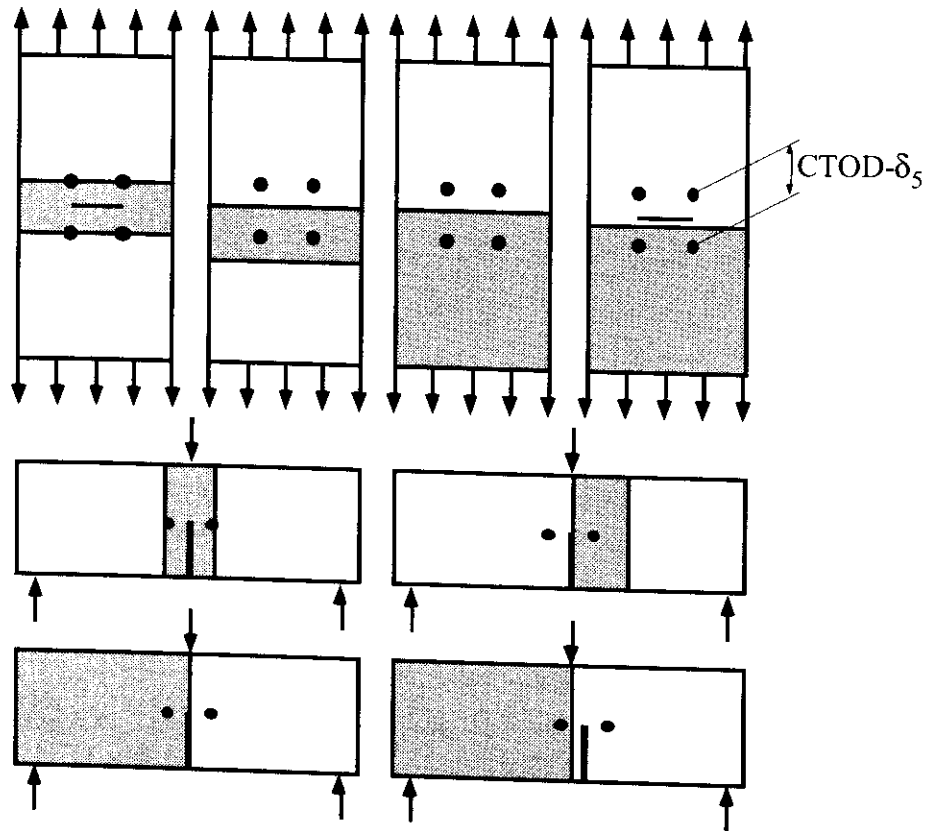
Location of δ_5 gauge points on welded specimens.
